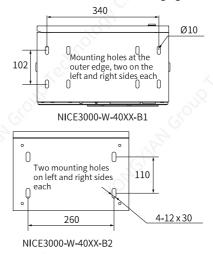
Locations and dimensions of the mounting holes at the bottom of the MRL control cabinet (Unit: mm)
